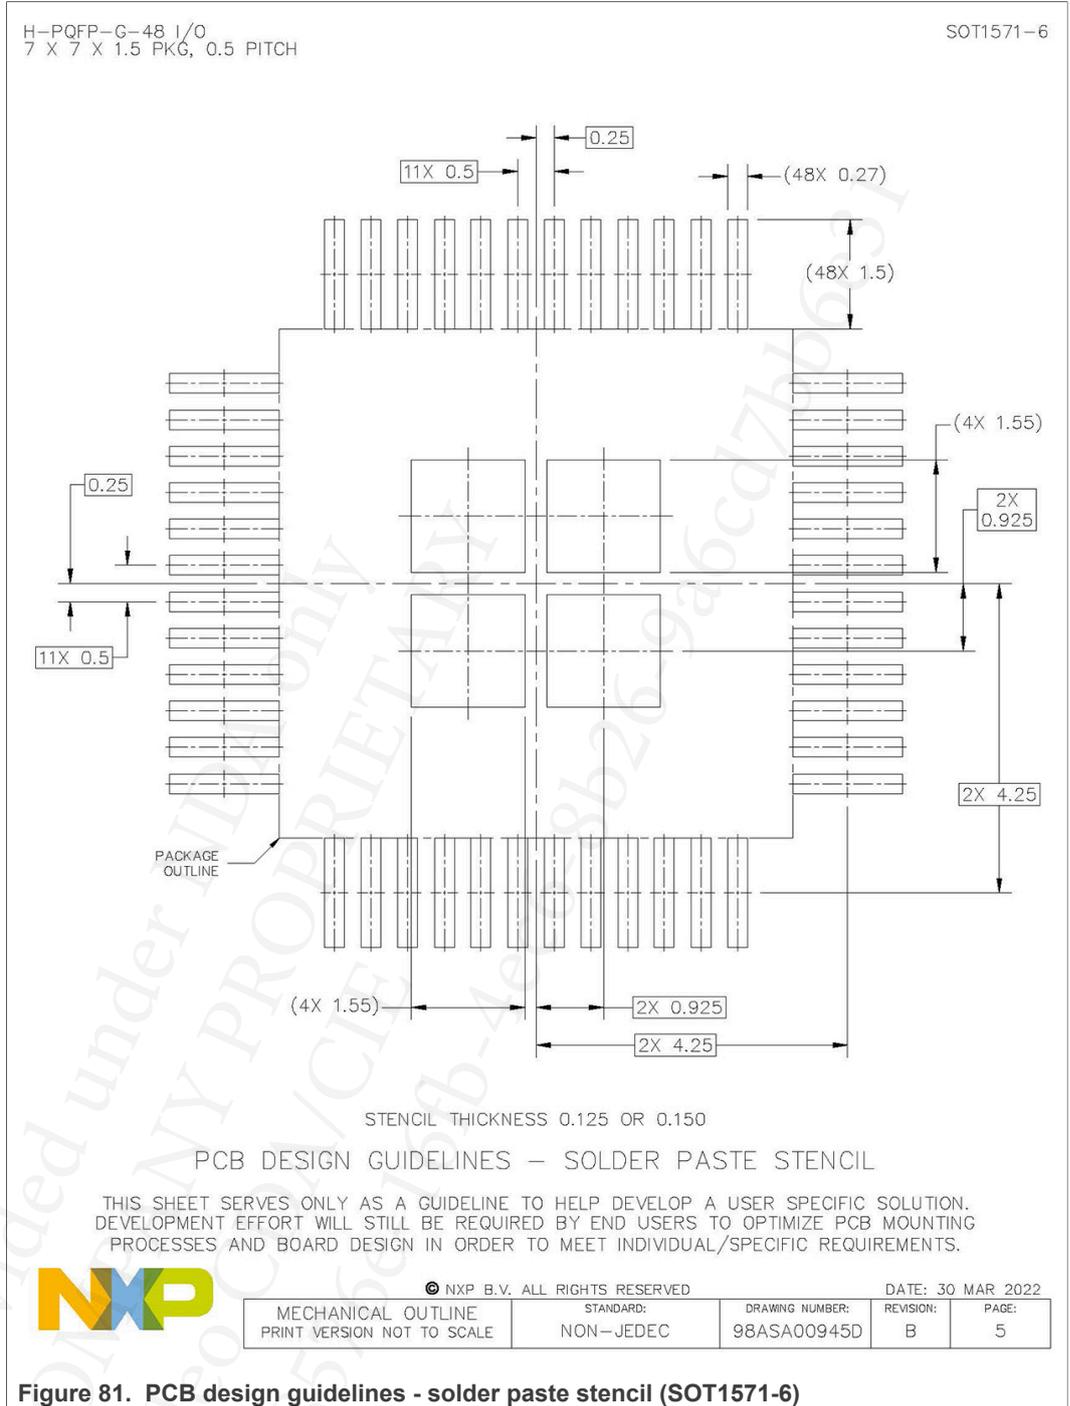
PCB design guidelines - solder paste stencil (SOT1571-6)
